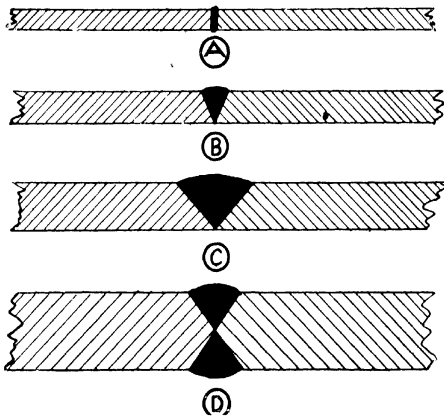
TYPES OF PLATE WELDS.
